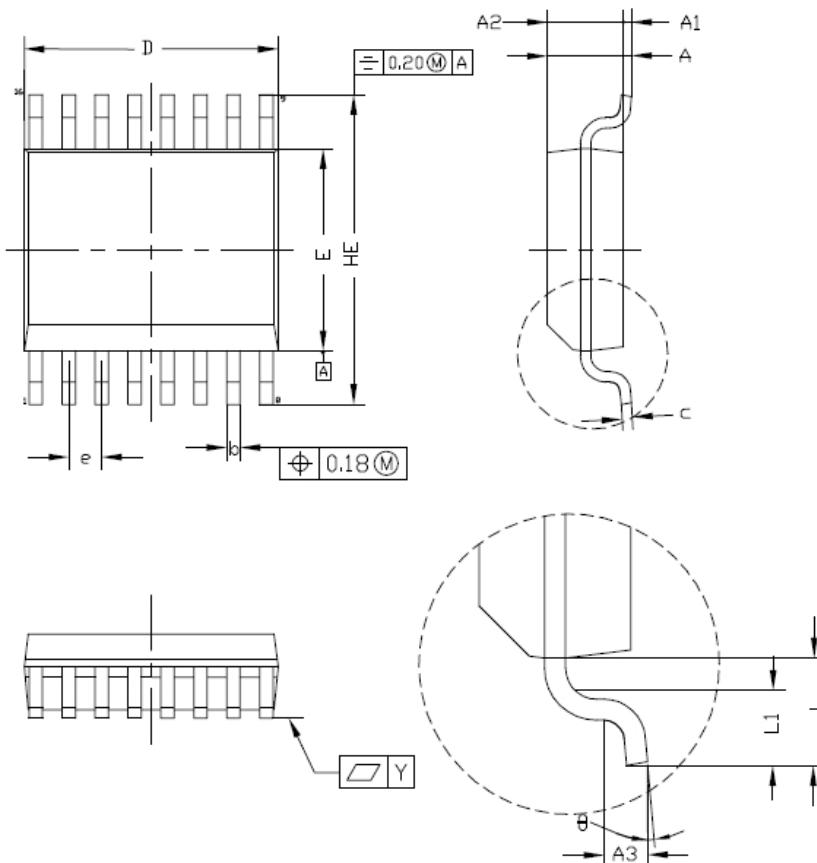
SSOP16 Package Shape and Dimension in millimeters (inches)
